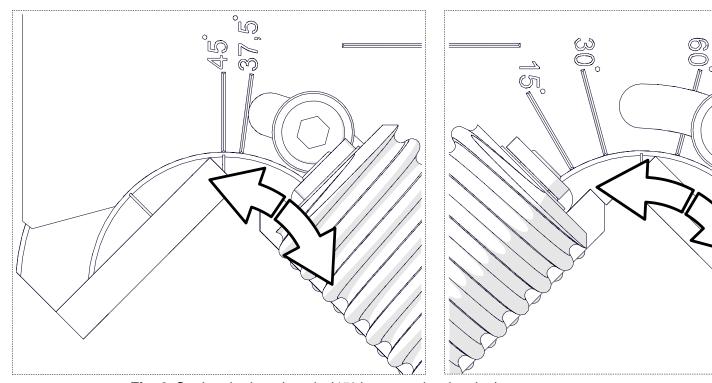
Setting the bevel angle (45° is set on the drawing)
